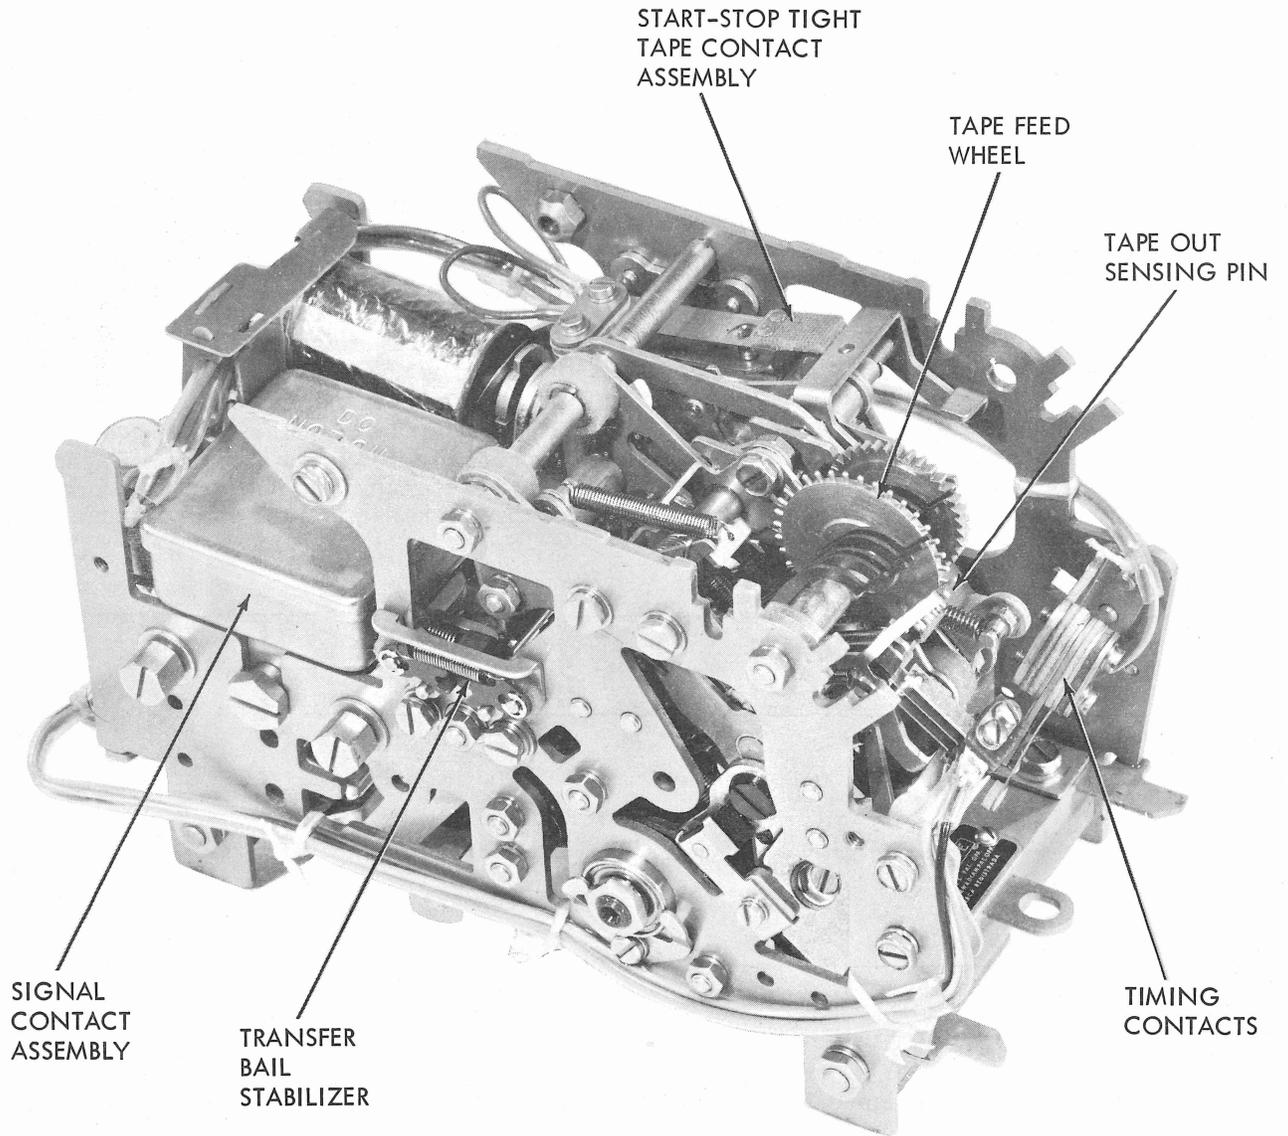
Transmitter Distributor, Covers Removed (Side View)
